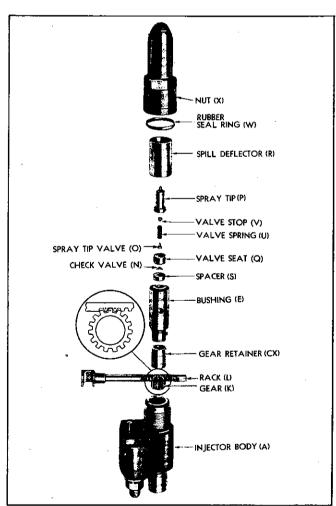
Injector Rack, Gear, and Spray Tip Details.
